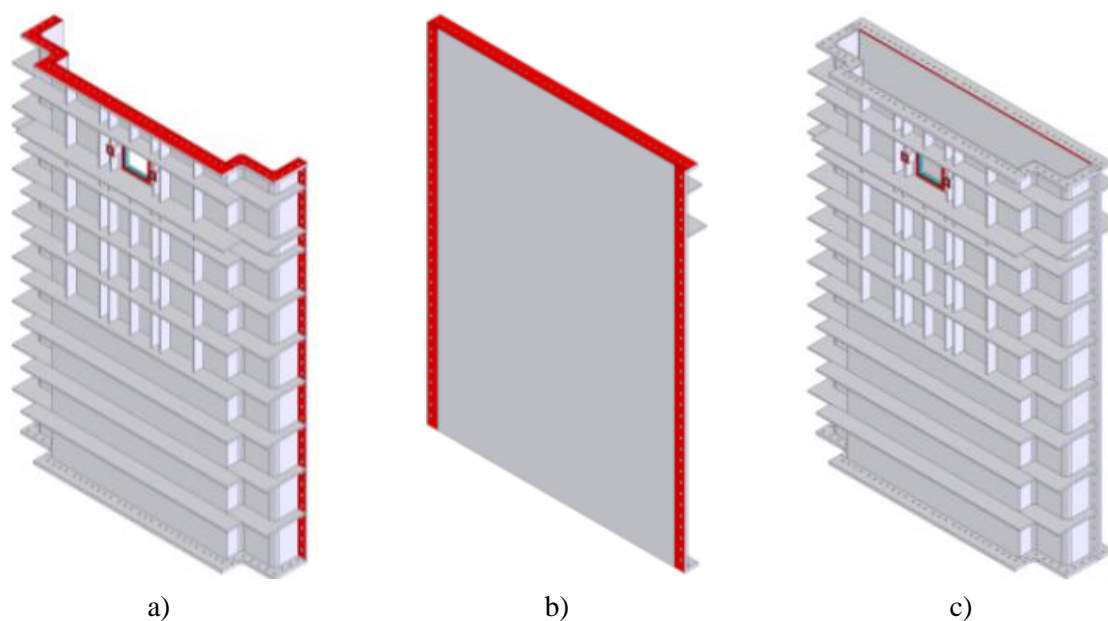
Subassembly 1; a) upper cap CS1, b) lower flat cap CS2; c) mounted subassembly
